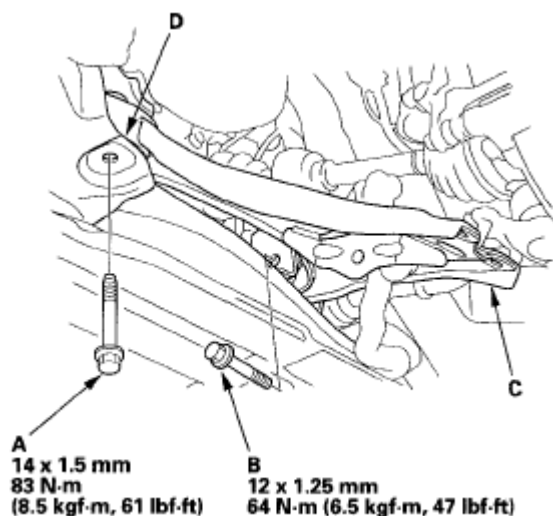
Identifying Lower Arm Mounting Bolt (With Torque Specifications)
